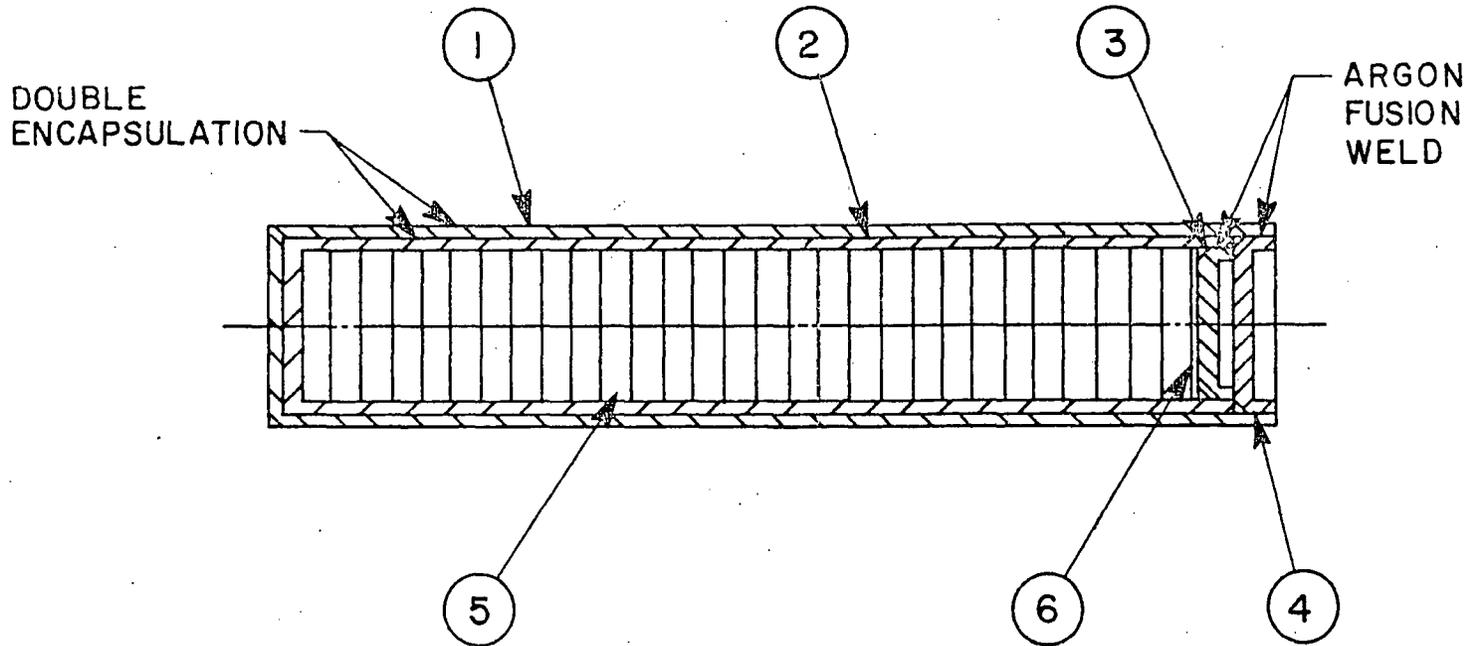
CAPSULE & RISE TUBE ASSEMBLY
